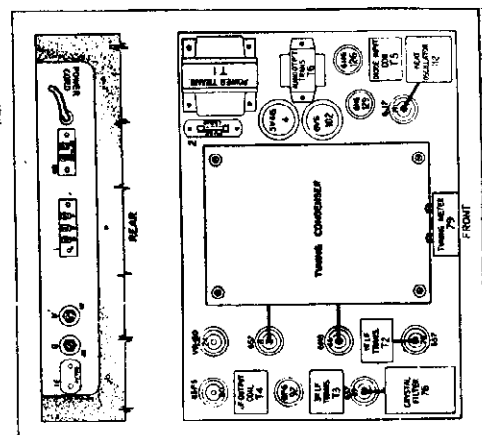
Chassis layout and motor adjustments "A" and "B."
